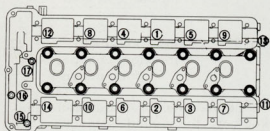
Cylinder Head Nuts Tightening Sequence Y5198
